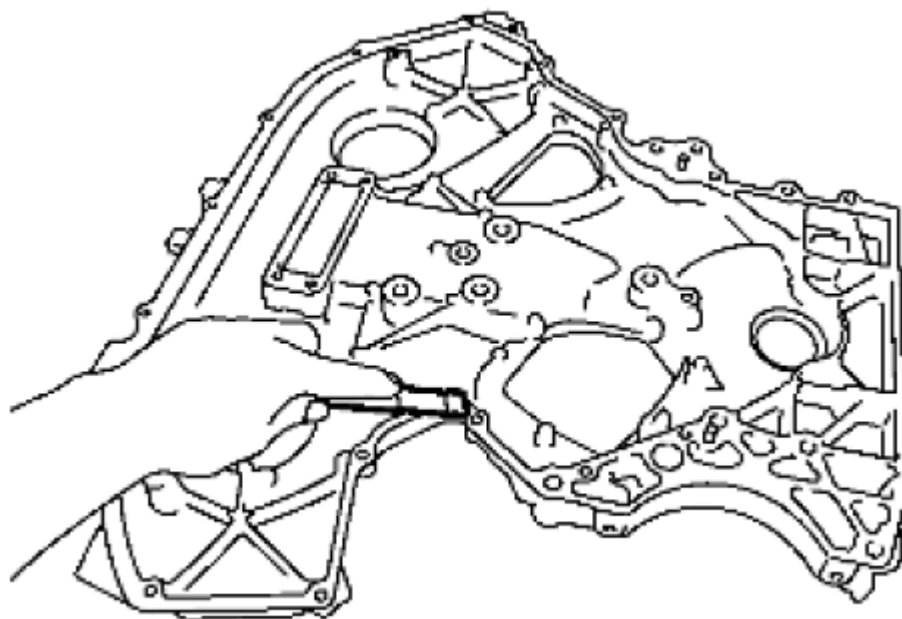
Removing Traces Of Old Liquid Gasket From Front And Rear Timing Chain Cases
